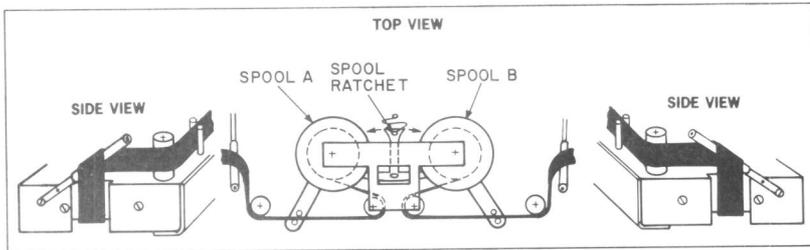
5000A or 5000A2 Printer Ribbon Path
